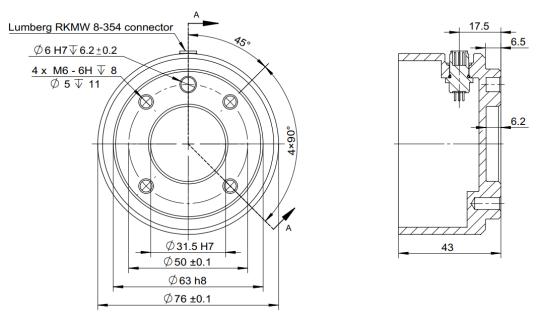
Mounting dimension drawing of the CS66 robot tool flange, with unit of mm
